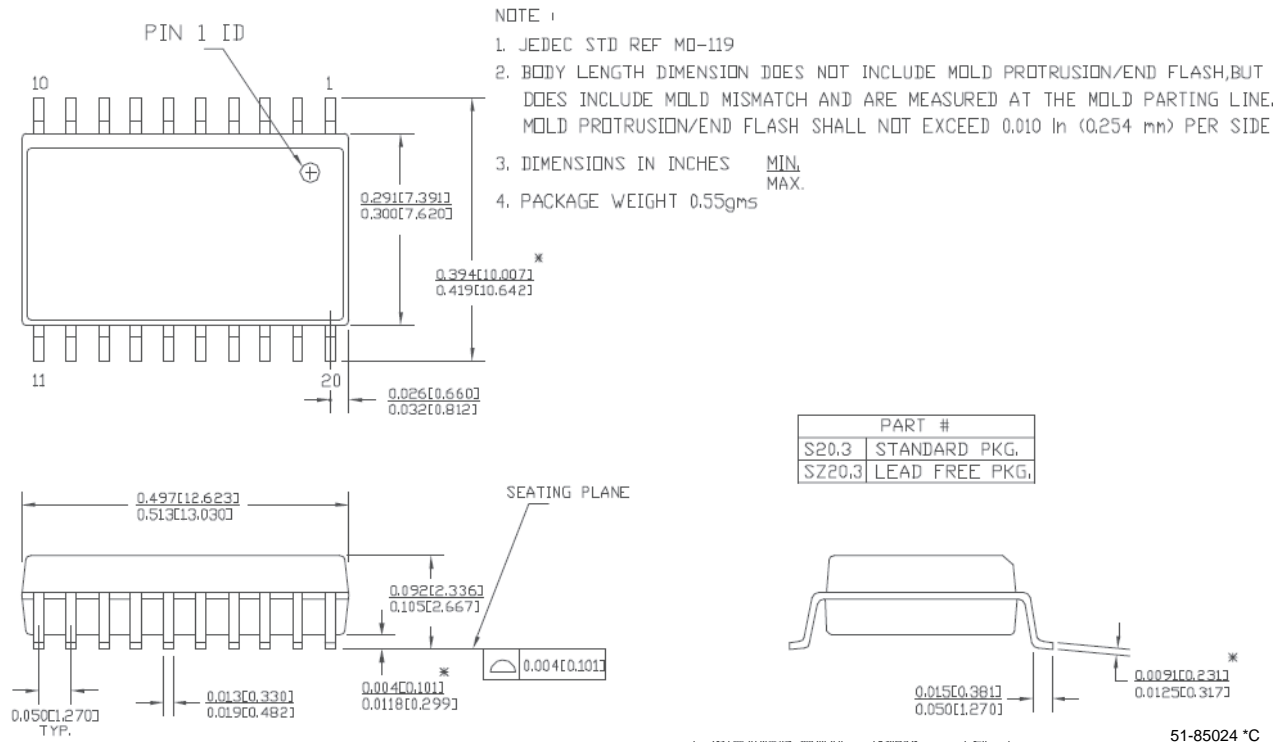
20-Lead (300-Mil) Molded SOIC
